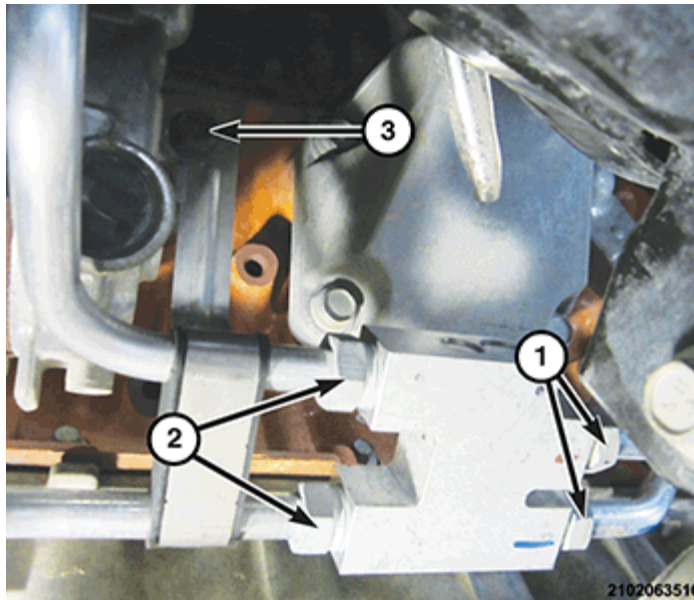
Transmission Cooler Lines & Bracket Bolt
